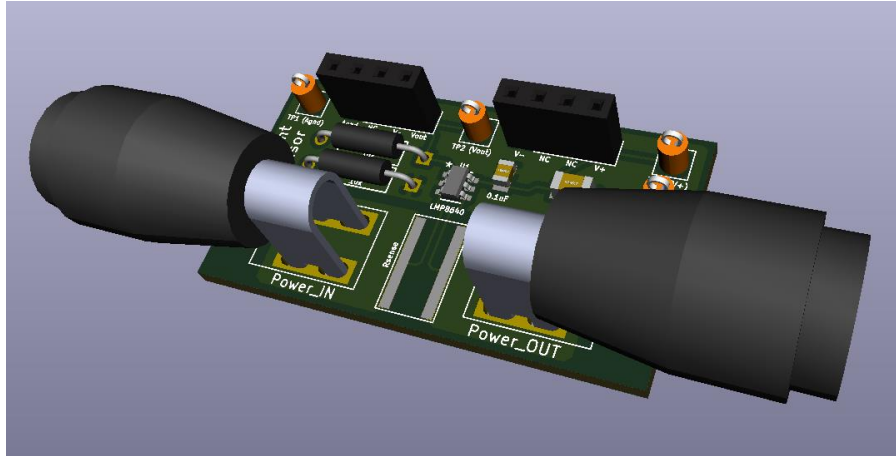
3-D Rendering of Current Sensor PCB.
